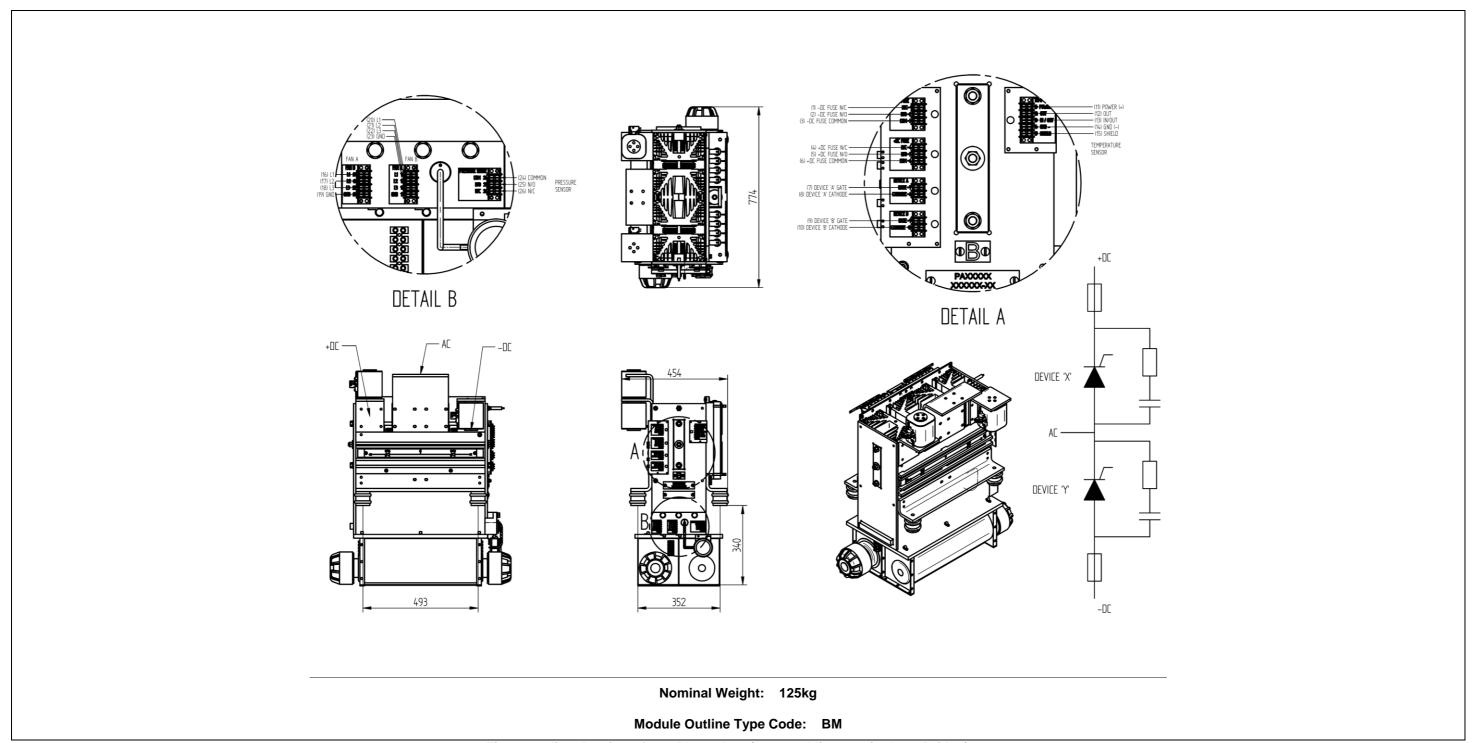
Outline drawing of one Phase Arm (3 assemblies required per Bridge)
